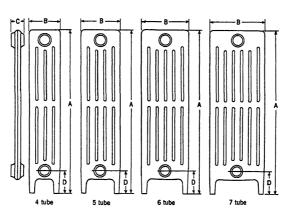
Types and Dimensions of Large-Tube Cast-Iron Radiators
